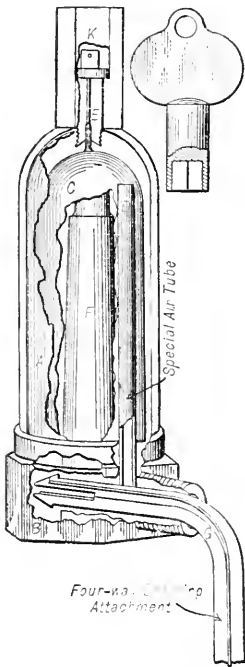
SECTION OF AUTO-MATIC STEAM-AIR VALVE.
